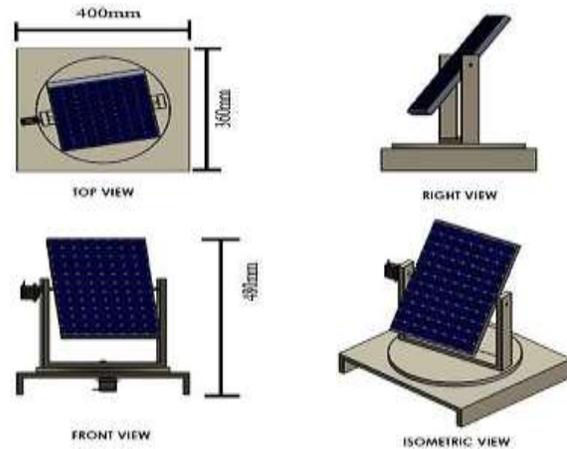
3D design of the proposed solar axis tracker; the front view, isometric view, and top view
